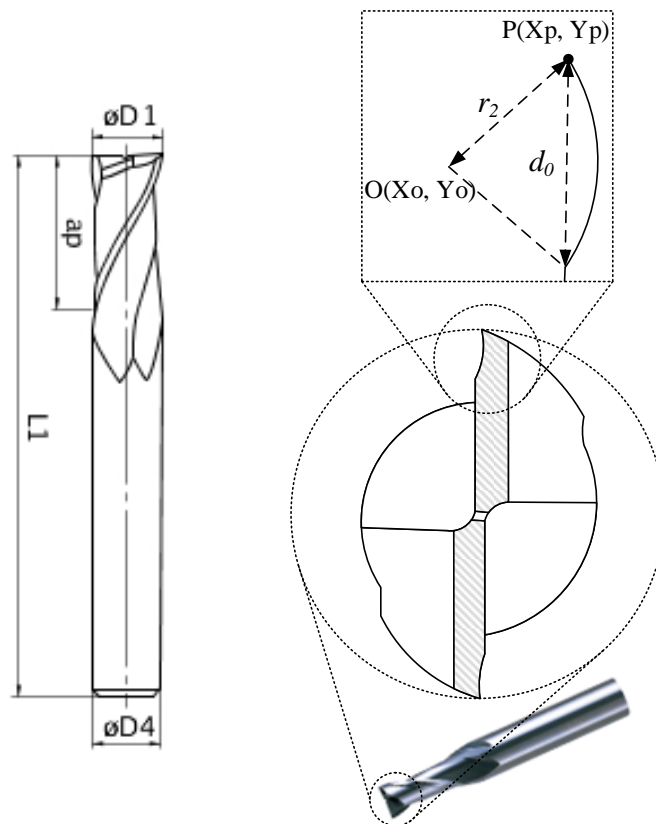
Cutting tool 2SSD1000S10 and its detailed geometry¹²⁾.
